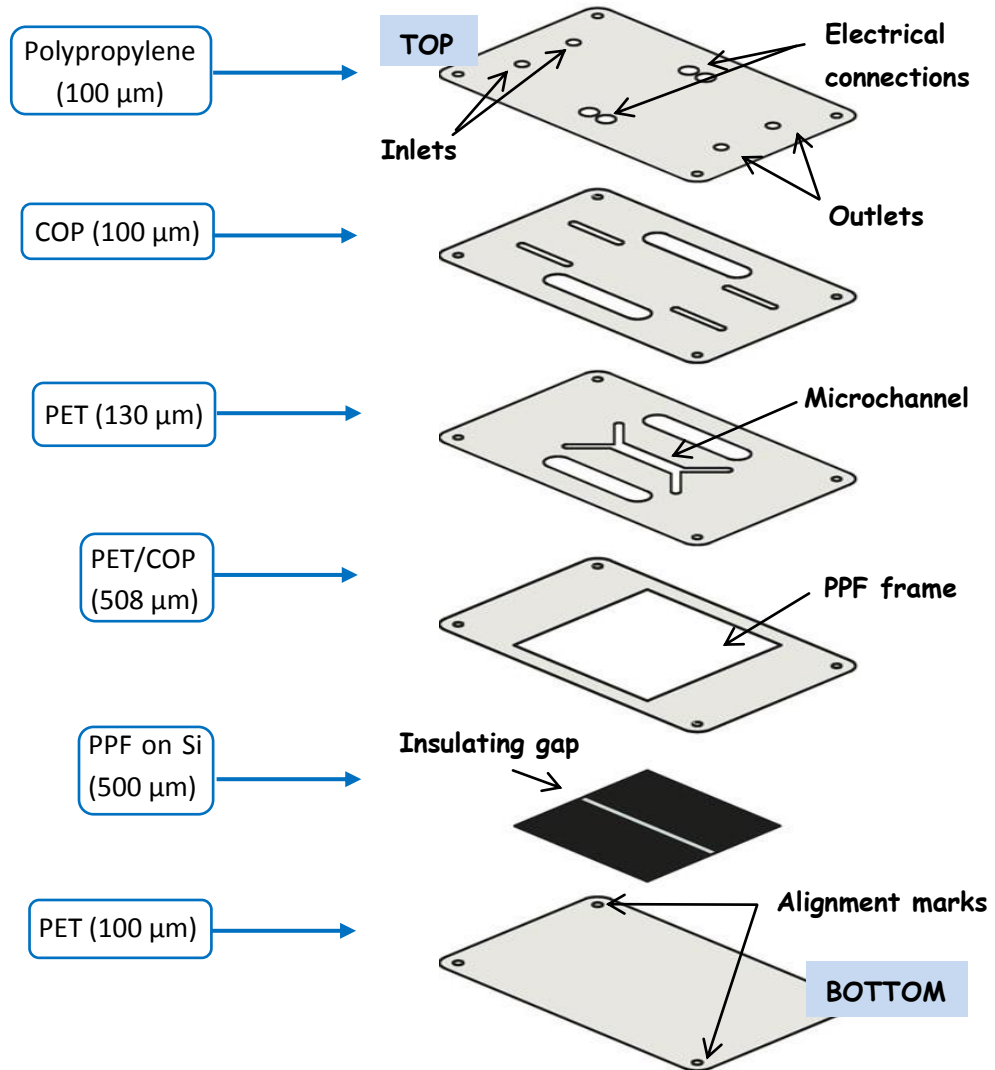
Exploded view of the multiple flexible layers forming the PPF-microfluidic fuel cell.
